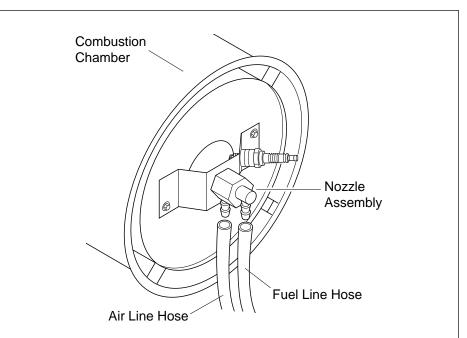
Removing Air and Fuel Line Hoses, 8,8 kW (30,000 Btu/Hr) Model
